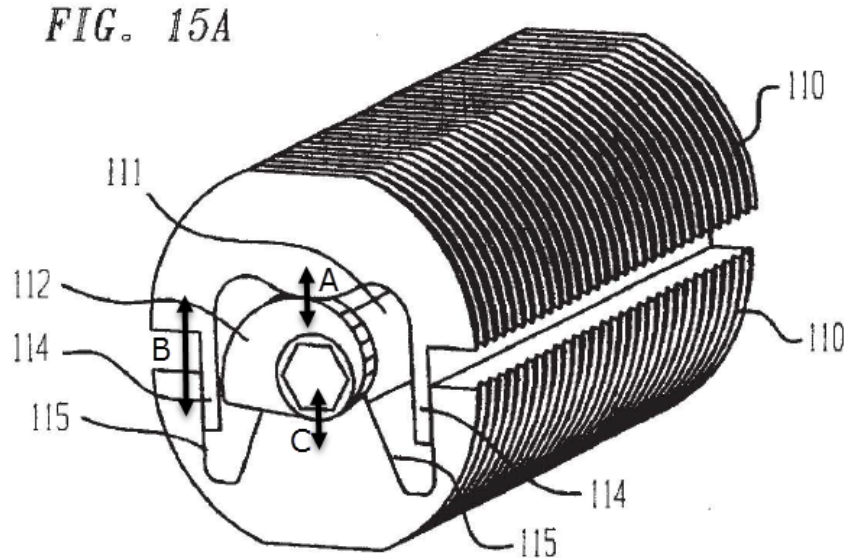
A of Cohen depicts a perspective view of a cam-type expandable cage having upper body 110, lower body 110, and cam 112 between.
